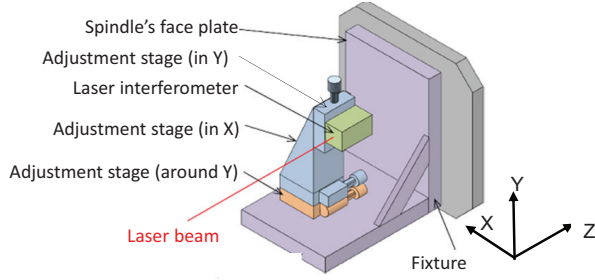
A fixture to attach a laser interferometer to the machine's spindle face plate.
